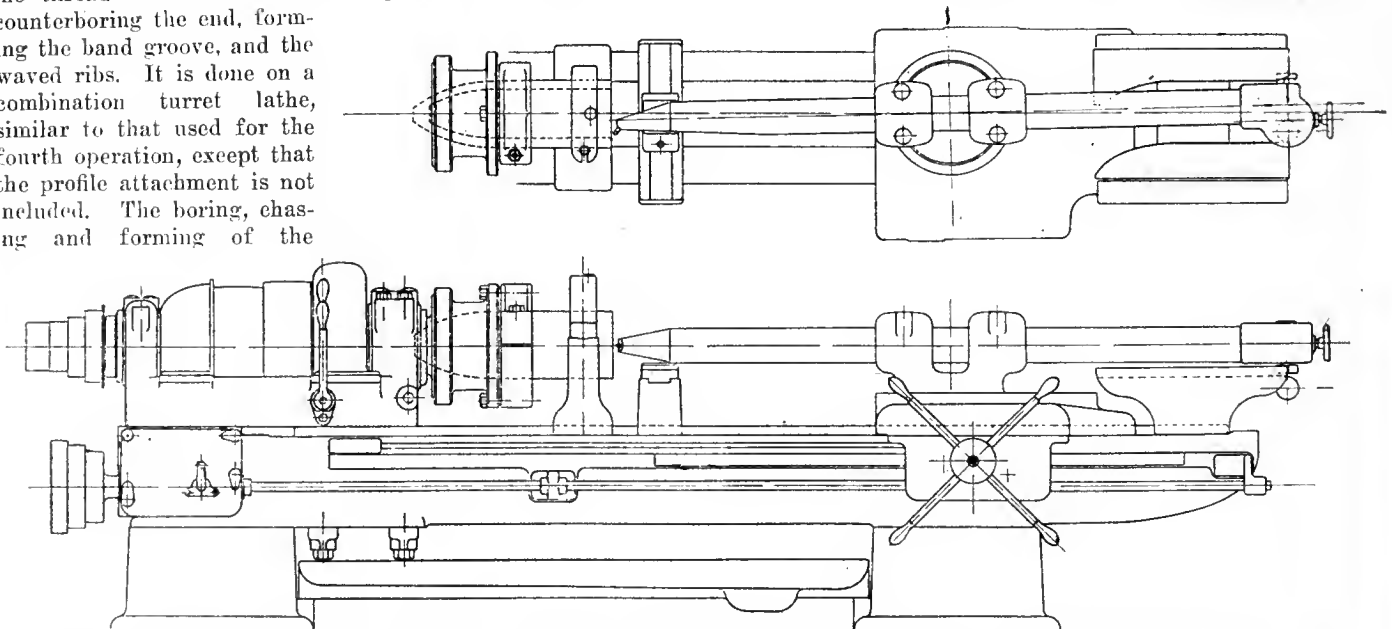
OUTLINE DRAWING OF SPECIAL LATHE FOR BORING 9.2 IN. HIGH EXPLOSIVE HOWITZER SHELL BODIES.
